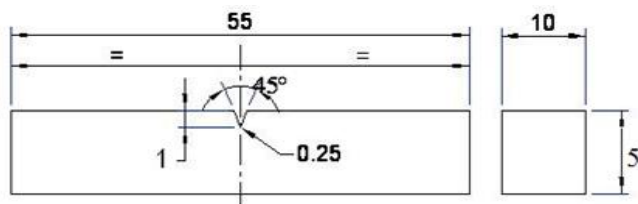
ASTM Dimensions (mm) for Impact test specimen
